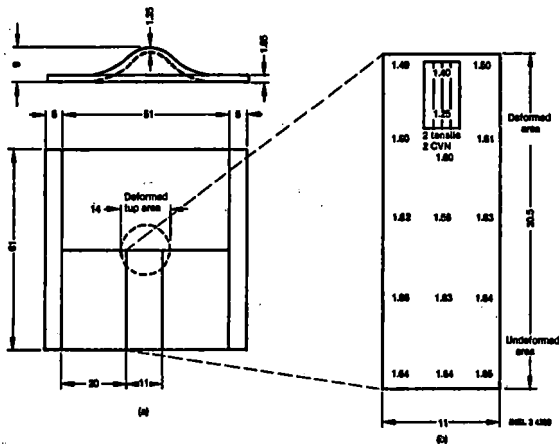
Thickness Measurements {mm} and Locations of Test Specimens Removed From Plate DH-26-04-83-22-160; a. General Schematic, b. Section Removed From Plate
